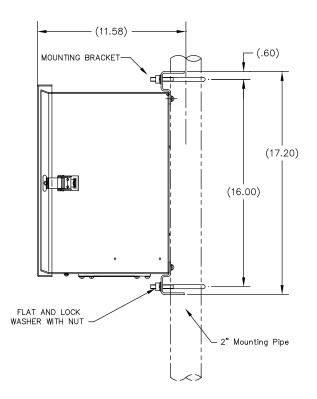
6200 Enclosure Pipe-Mounting Installation
